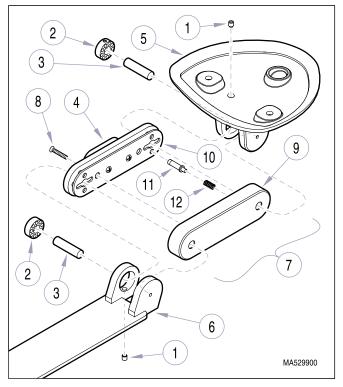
Headrest Assembly Stop Pin Removal / Installation
